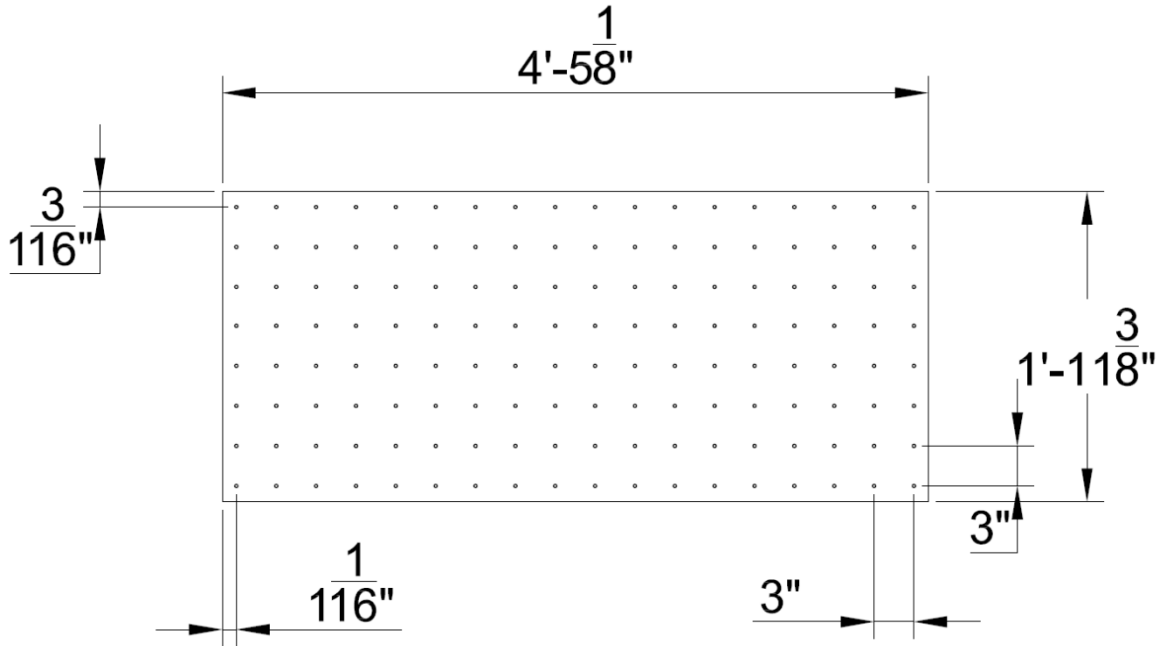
PERFORATED PLATE DIMENSIONS
